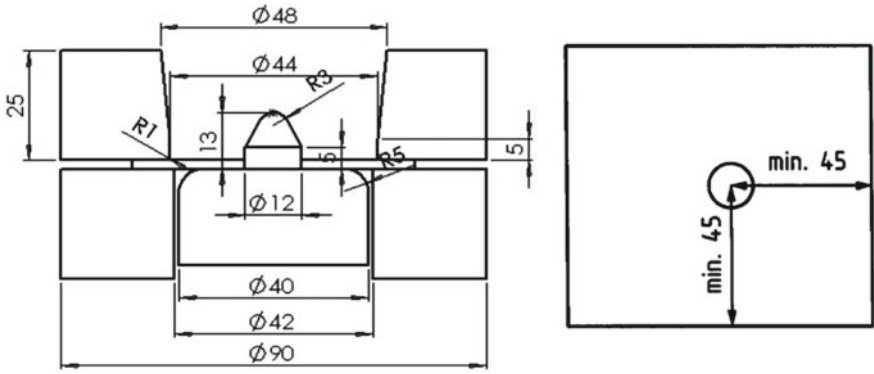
Hole expansion test—KWI: dimensions of the tools and specimen
